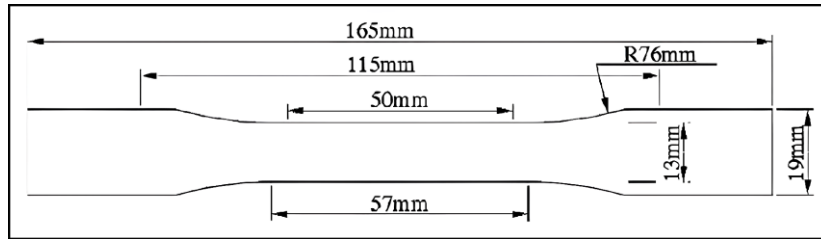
Dimensions of ASTM D 638-02 Type I Tensile Test Specimen (ASTM Book)
